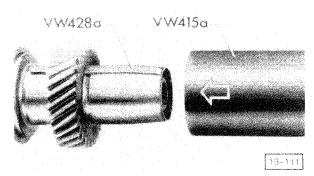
Distributor drive gear/crankshaft timing gear, removing
